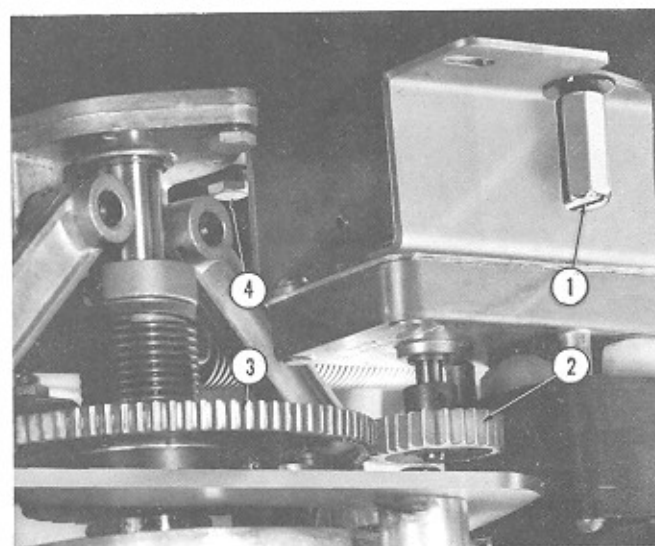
CHANGER MOTOR PINION GEAR ADJUSTMENT
